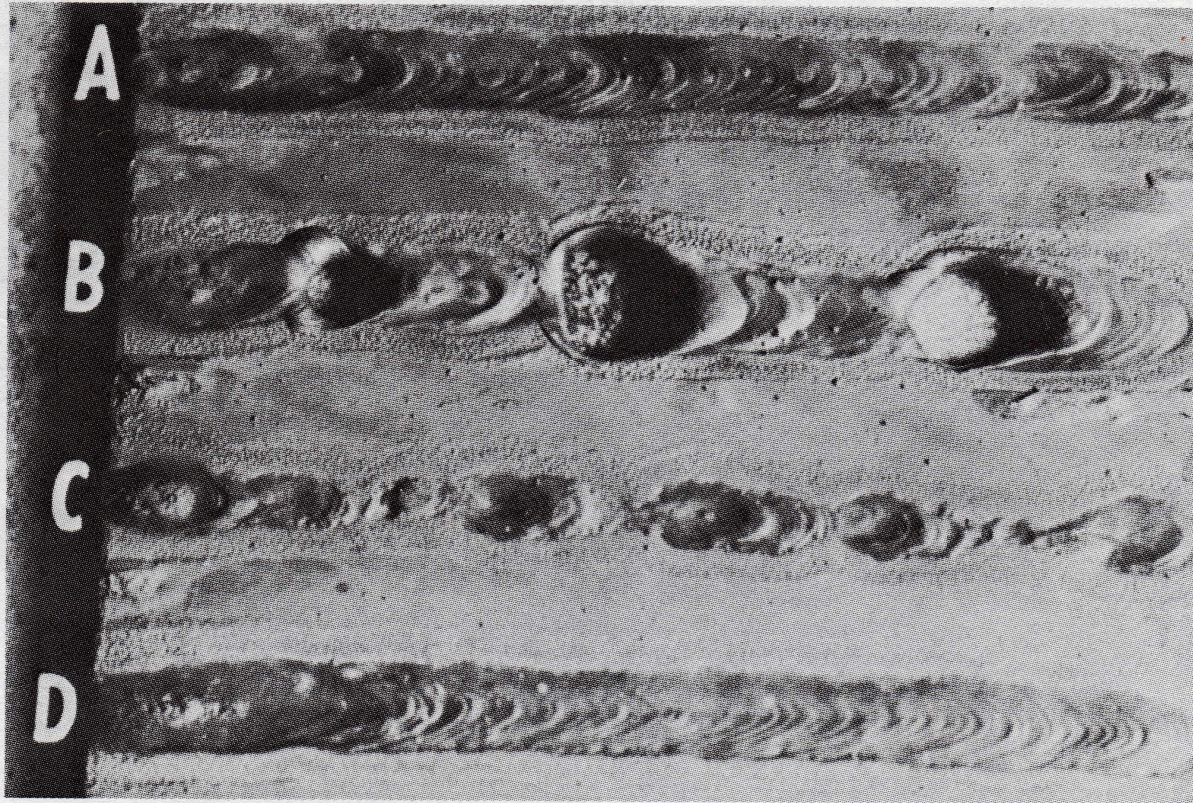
Samples of weld bead defects. (A) This is a fairly satisfactory weld bead. The ripple of the bead could be more uniform. (B) This poor bead may be caused by too slow a speed of travel or by a torch tip too large for the particular thickness of material being used. (C) This defect is generally caused by moving too rapidly and not allowing a proper weld bead to form. (D) This is a satisfactory weld except for the burned section at the end. This defect is caused by not moving the weld bead fast enough as the weld is being completed.
